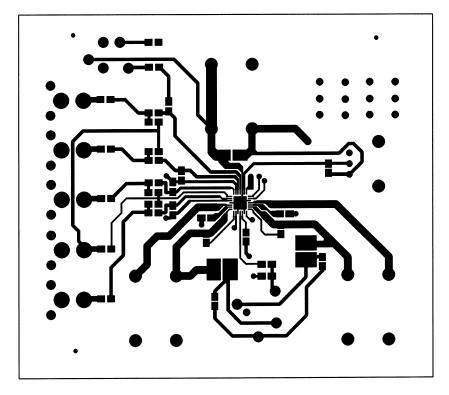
Recommended LQ PC Board Layout: Component-Side Layout
